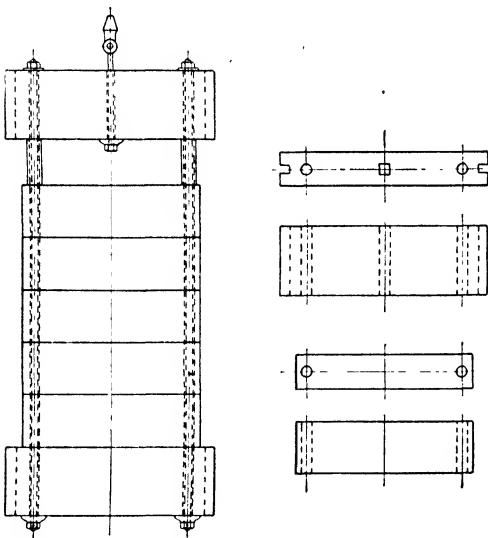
Elevator Counterpoise Weights, Showing Method of Fastening
